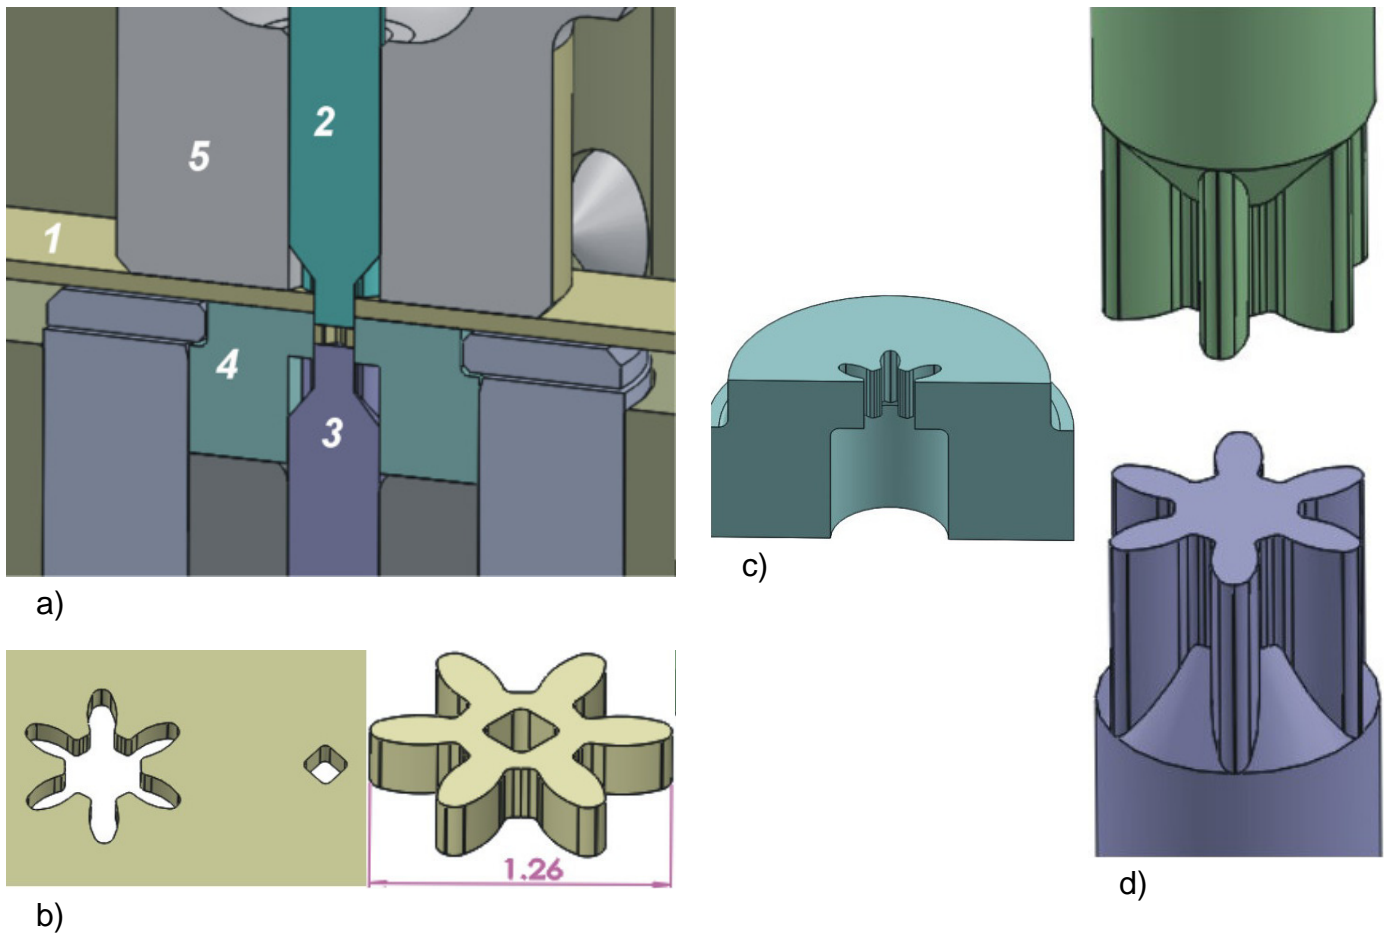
Example of possible manufacturing process of 2d-part, micro-gear: (a) process design, 1 – strip, 2 – punch, 3 – counter-punch, 4 – die, 5 – blank holder, (b) strip and blanked micro-gear, (c) die, (d) punch and counter-punch
